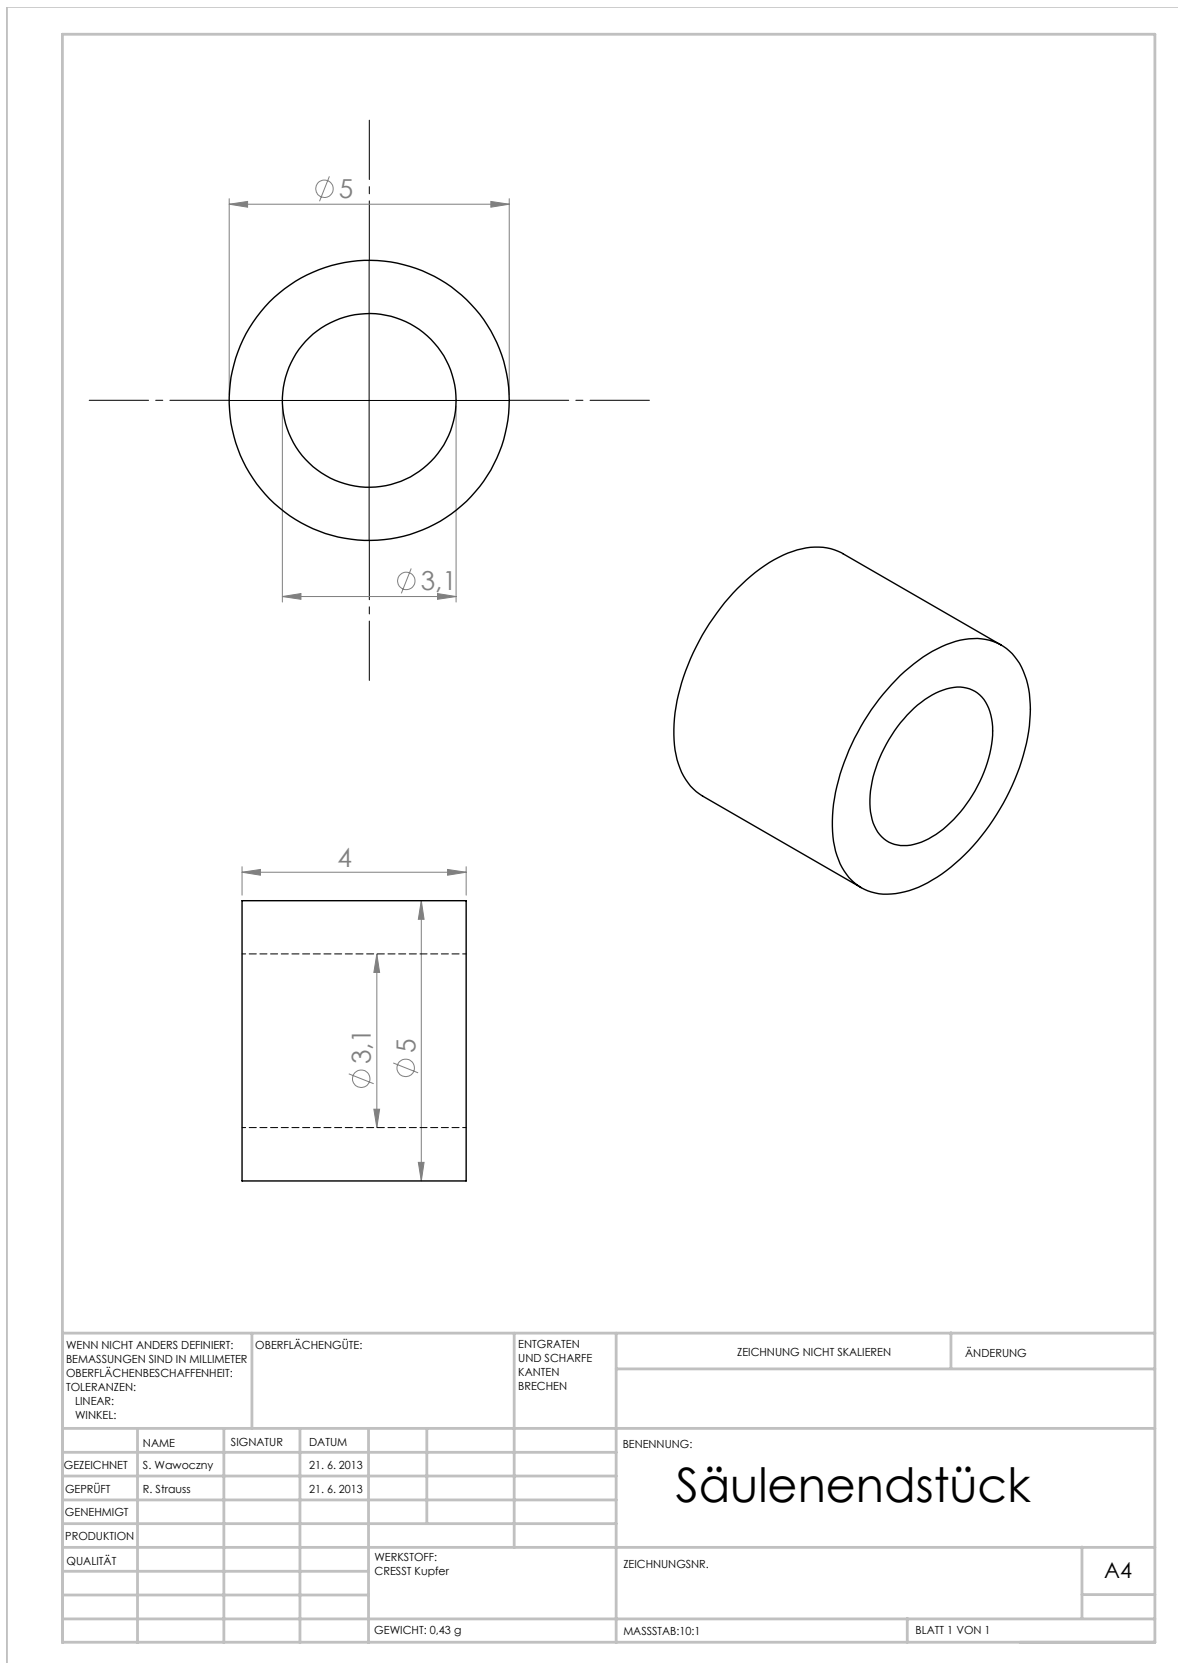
Technical drawing of the post connecting the copper rings according to figure B.1.
